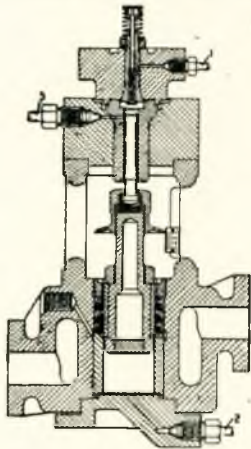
The Krupp design with special piston rings for the lower piston.
